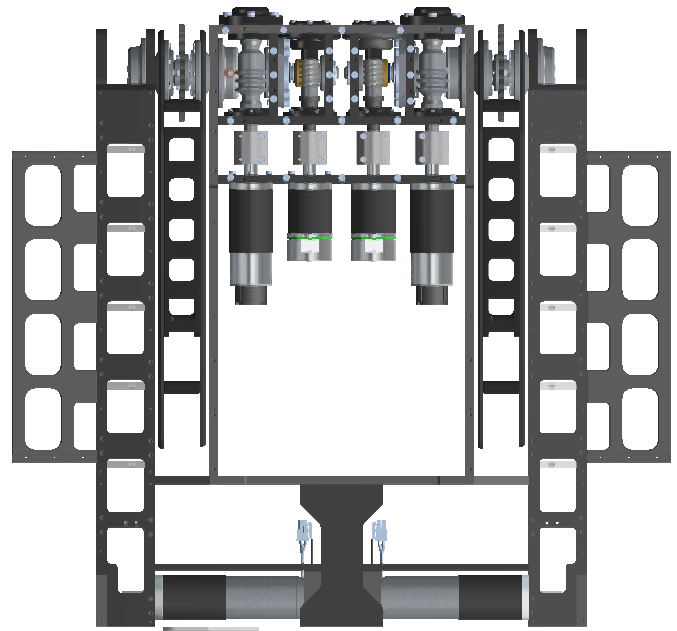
Top view of R.U.D.I.'s partly-assembled frame and gearbox.
